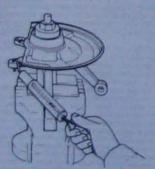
Using a spring balance to check the load required to start the swivel hub turning (Sec 3)
